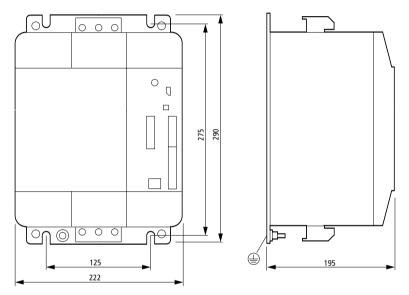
Dimensions, DM 4-340-7K5 to DM 4-340-37K
